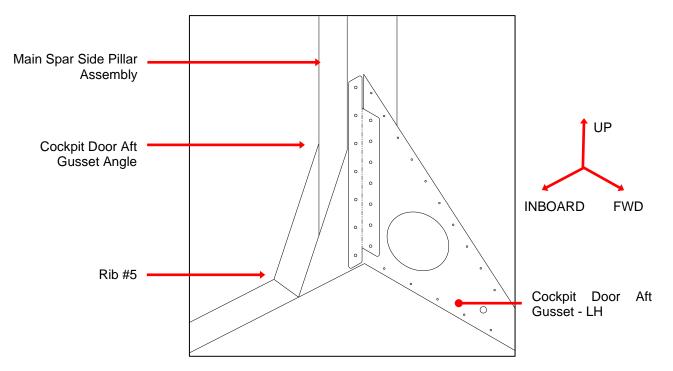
Cockpit Door Aft Gusset Angle Attachment (LH shown, RH similar)
